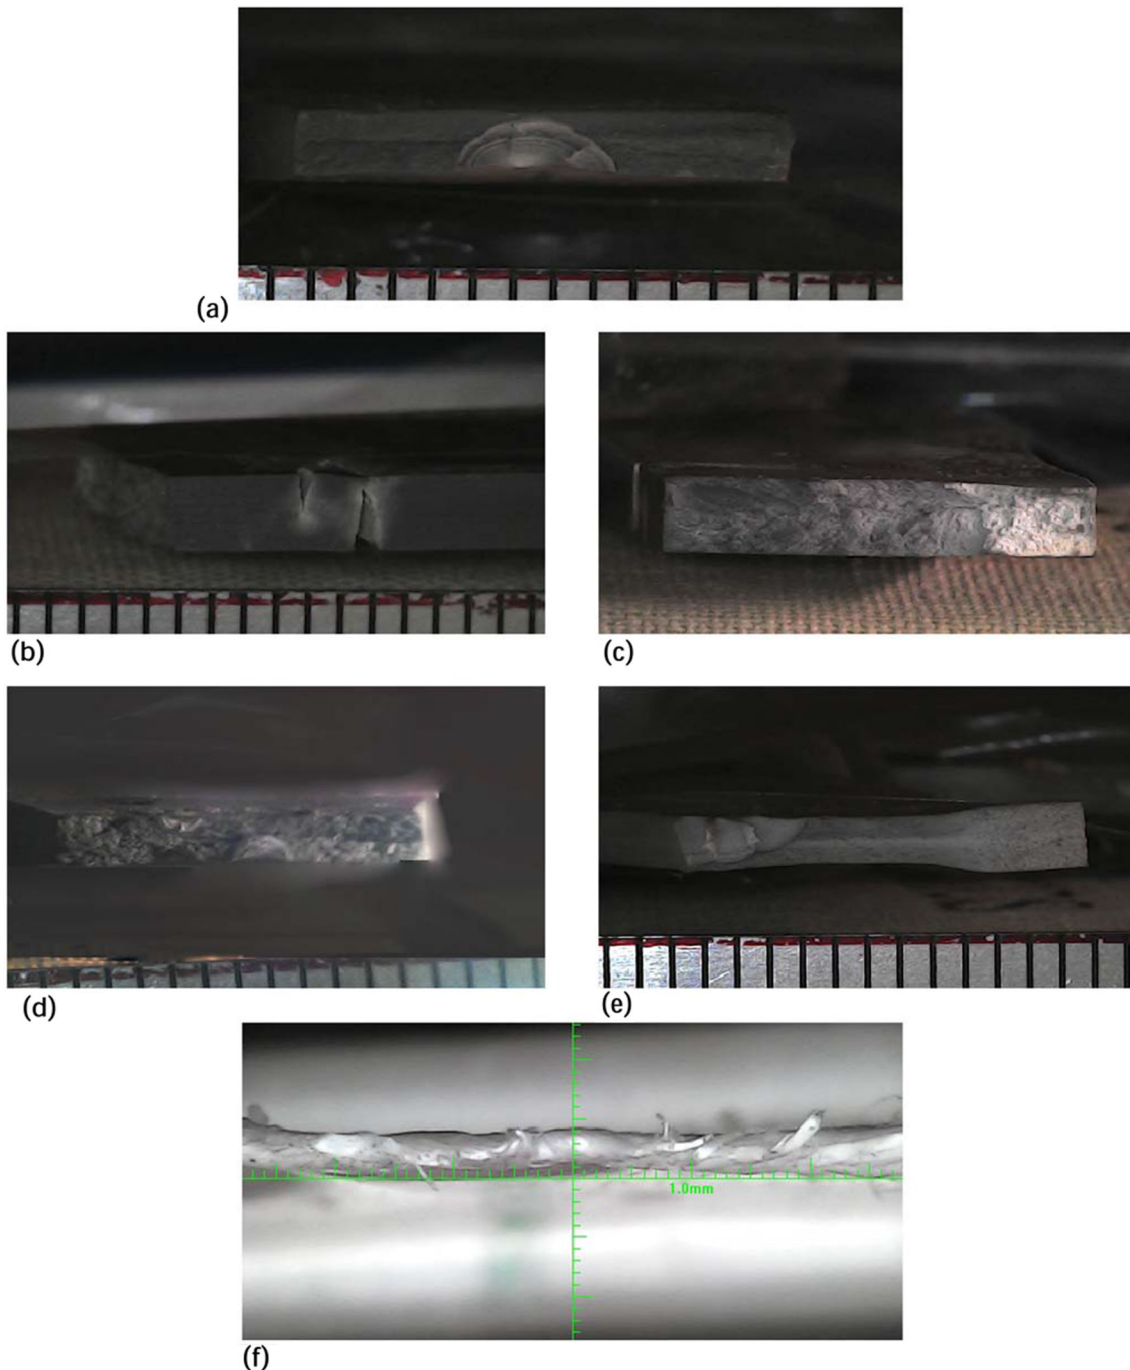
Samples fractography of the failed specimens (a) PVC Fatigue central crack, (b) PVC side view of fatigue side crack, (c) PVC fracture surface sample in (b), (d) PVC ductile fracture, (e) PVC creep fracture, (f) HDPE thermal failure
